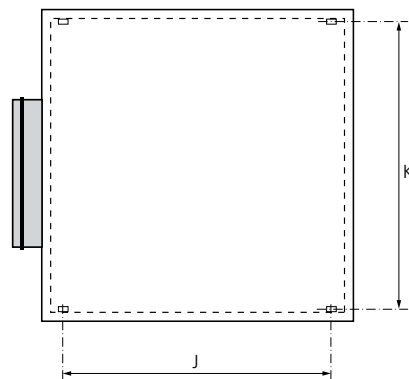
CDH/CLH, suspension (Measurements JxK in table Filter dimensions below).
